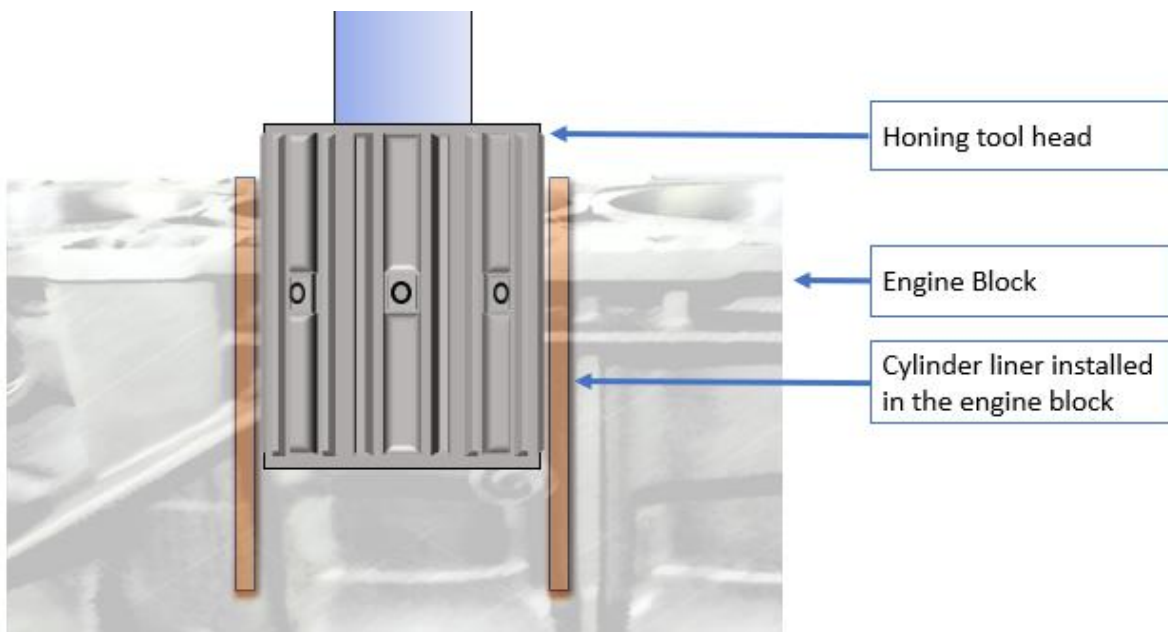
Mock-up sketch of the bore honing machine with a liner being honed.
